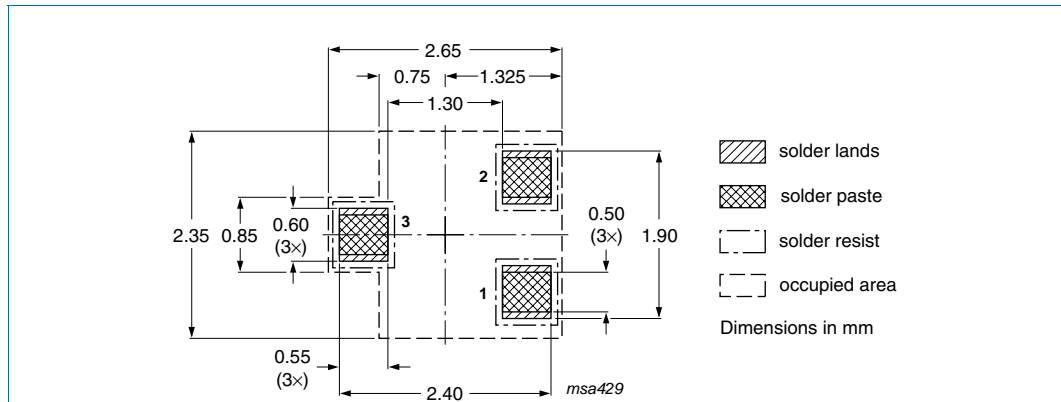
Reflow soldering footprint SOT23 (TO-236AB)
